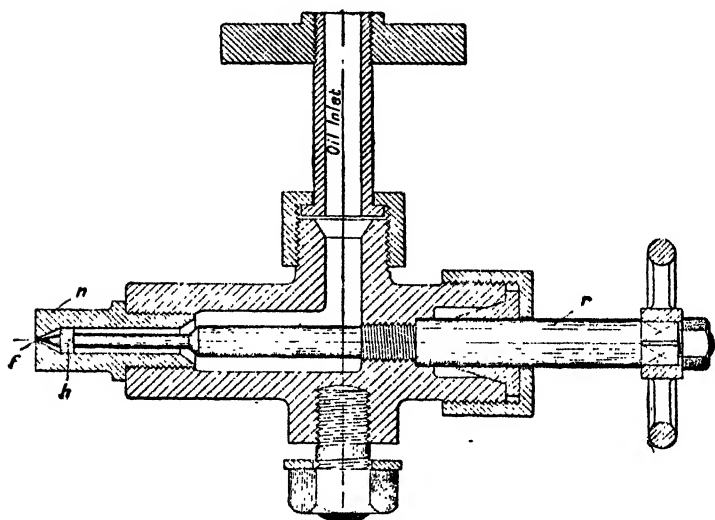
Sectional view of Wallsend pressure-jet fuel-oil burner.
